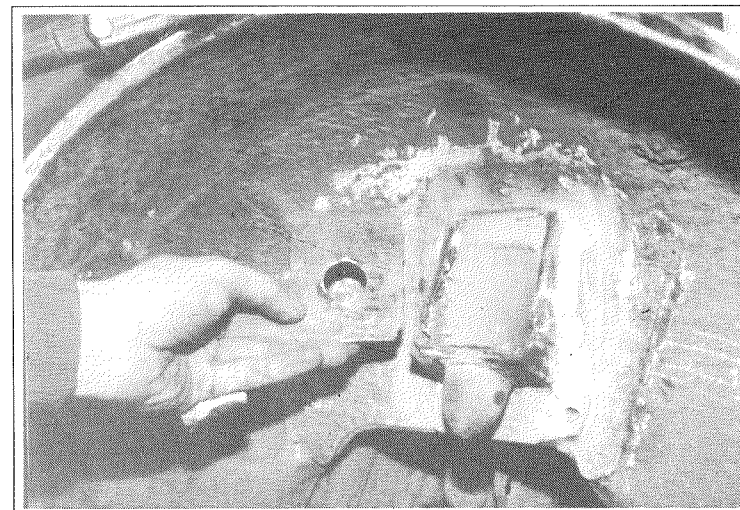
Cut out the rot, make and weld in the required repairs...
